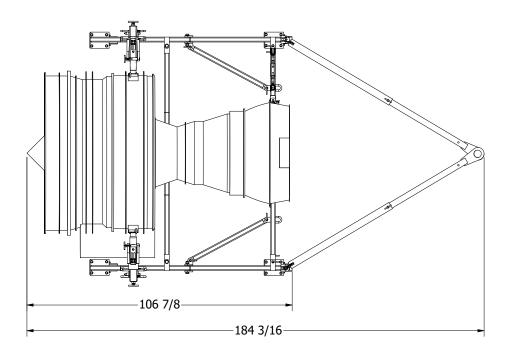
AGSE-E058-G02 - Dimensions
